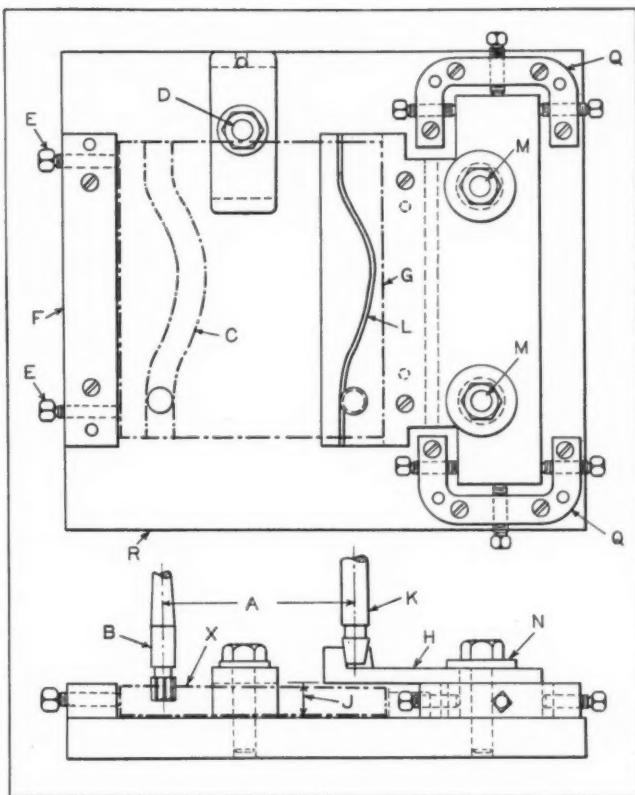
Profile Milling Fixture Designed for Use when Width of Work Exceeds Center Distance between the Cutter and Guide Pin
